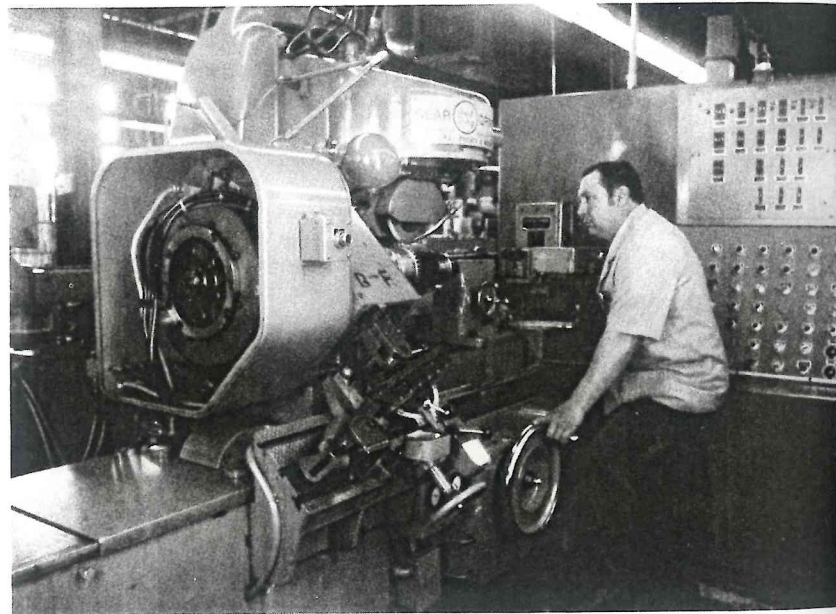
Form grinding machine. (Courtesy of National Broach and Machine Division of Lear Siegler, Detroit.)
